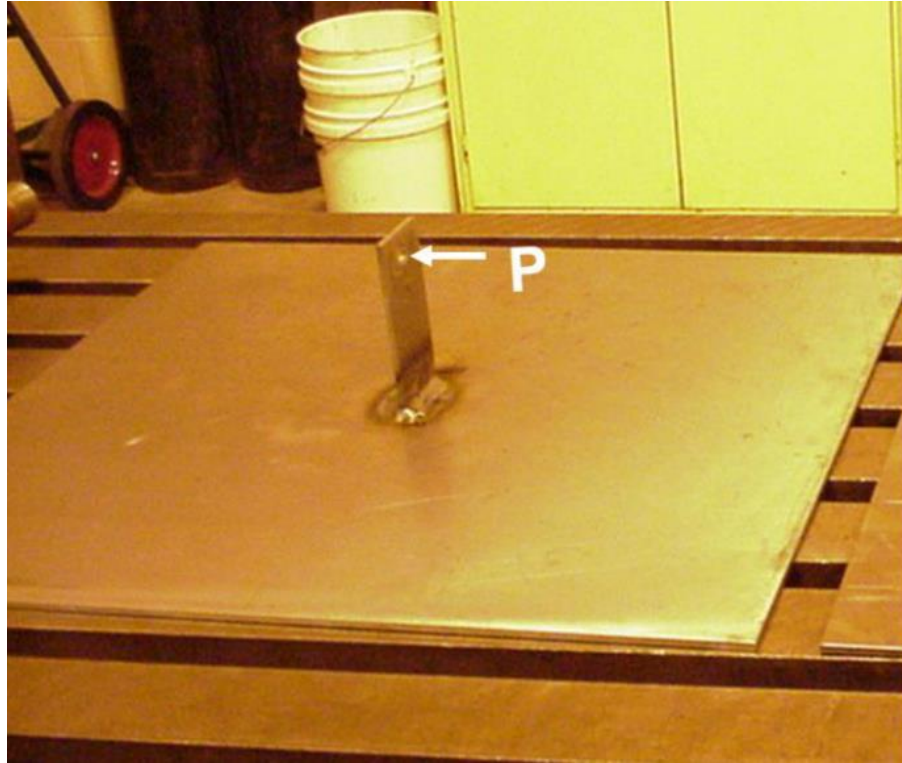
2: Welded T-joint specimen subjected to out of plane bending loading (JD)
